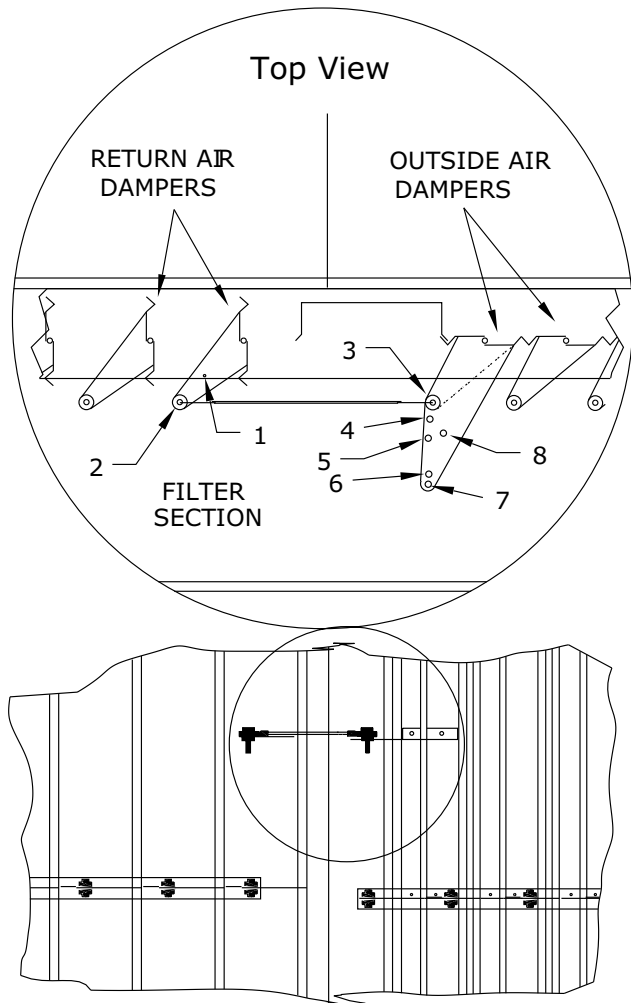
Outside air linkage adjustment (ultra low leak dampers only)
